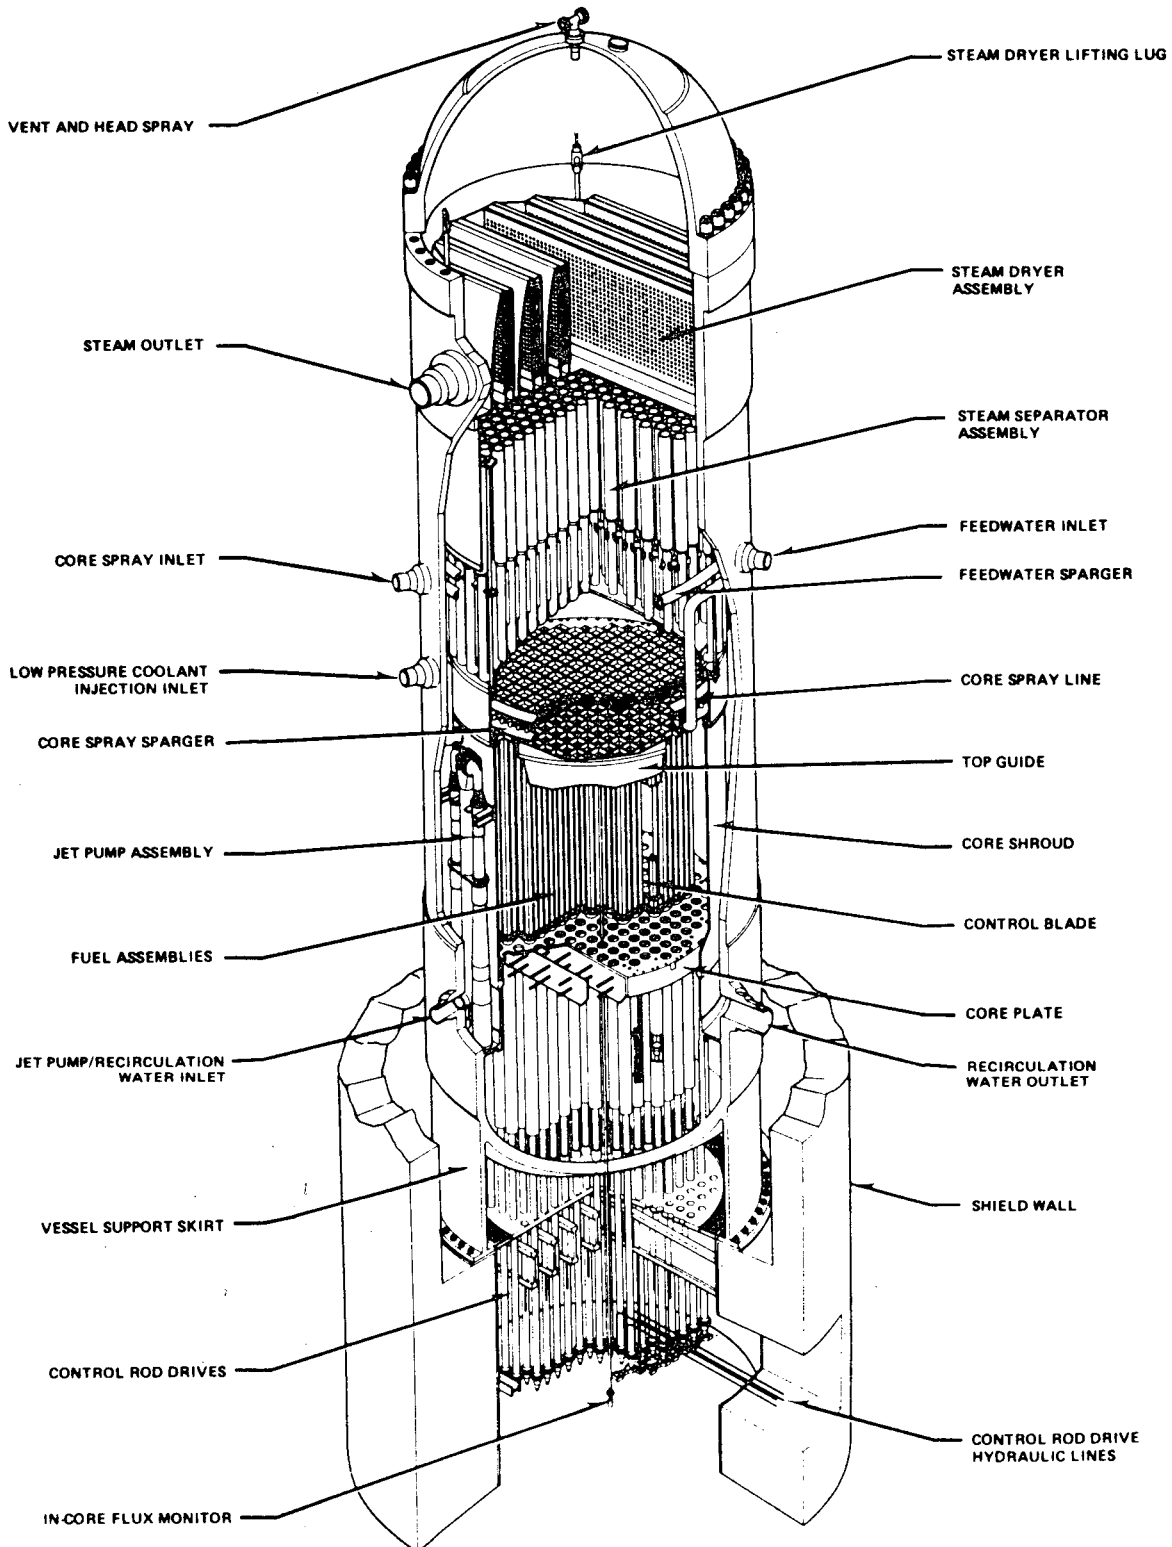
BWR-6 REACTOR ASSEMBLY
